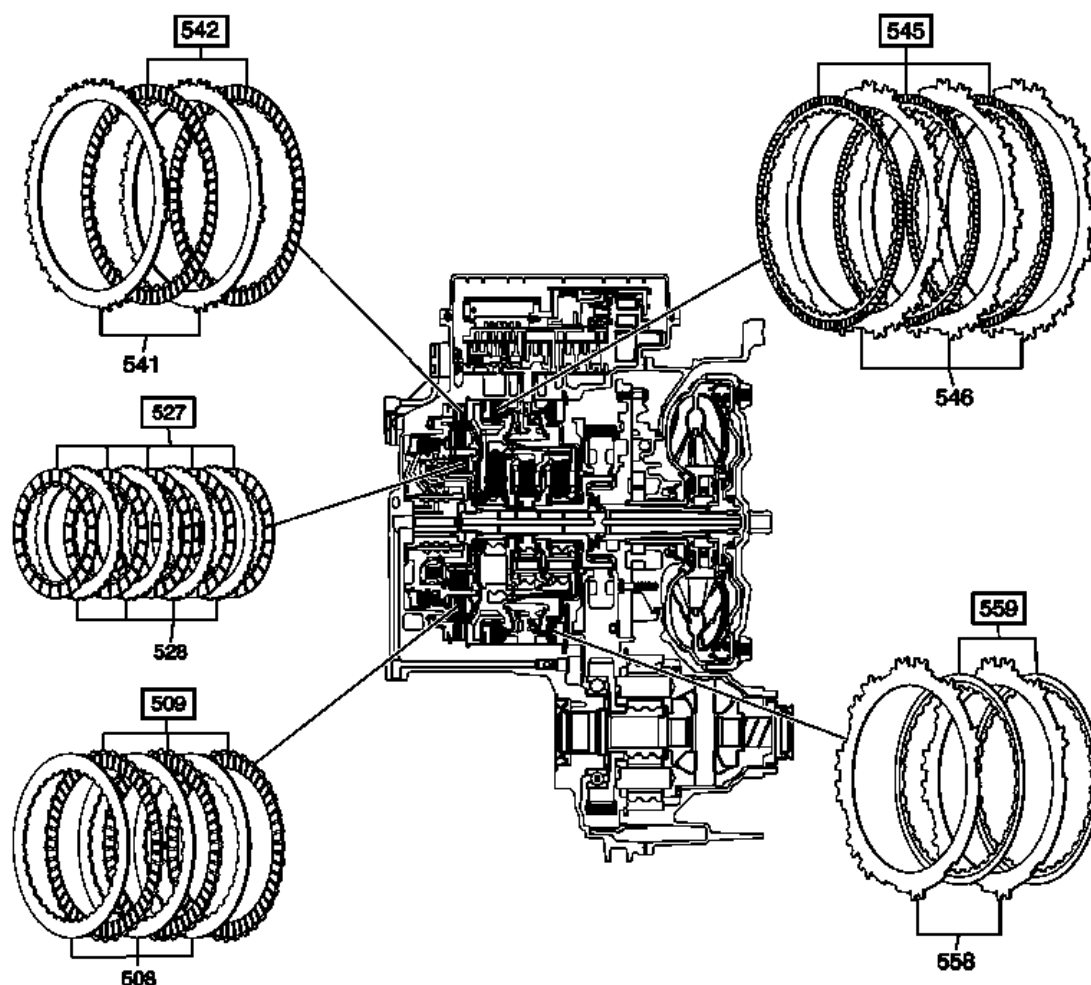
Clutch Plate Package (Gen 2) 24260695
